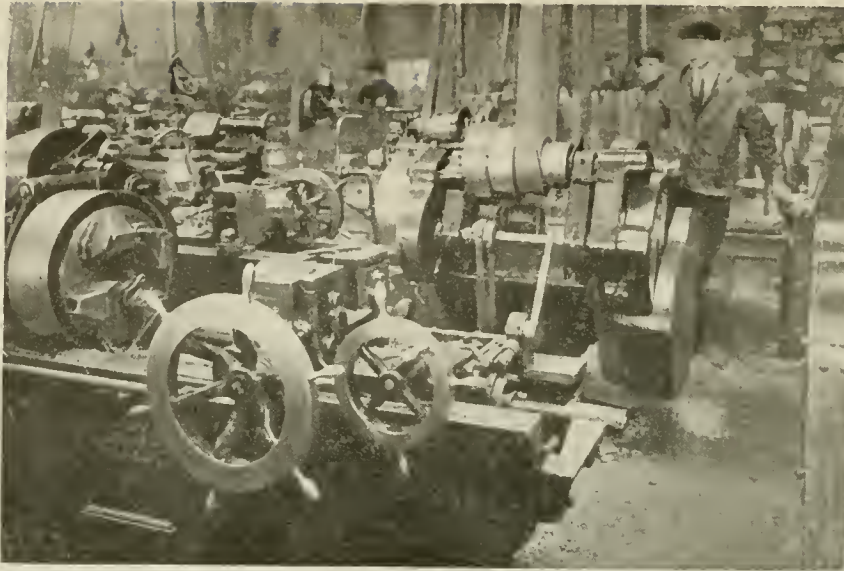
"LANDIS" BOLT CUTTERS THREADING 9.2 IN. ADAPTERS.
